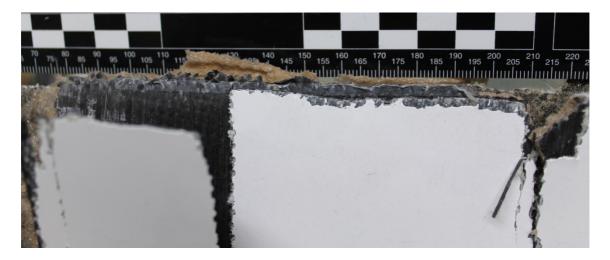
Upper sandwich structure fracture surface from the upper wing surface (Source: Author)
